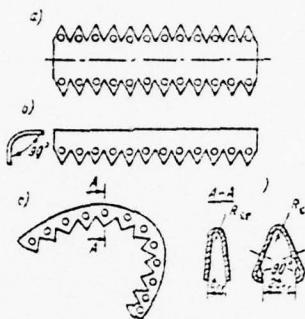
Diagram of preparation of edging: a - spreading out of the edging after the cutting of teeth and drilling of holes; b - edging after preliminary bending; c - edging after bending to radius and model; d - edging after setting and bending of teeth.
